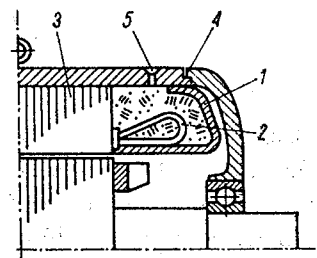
Schematic showing construction of the motor cooled by means of melting heat
